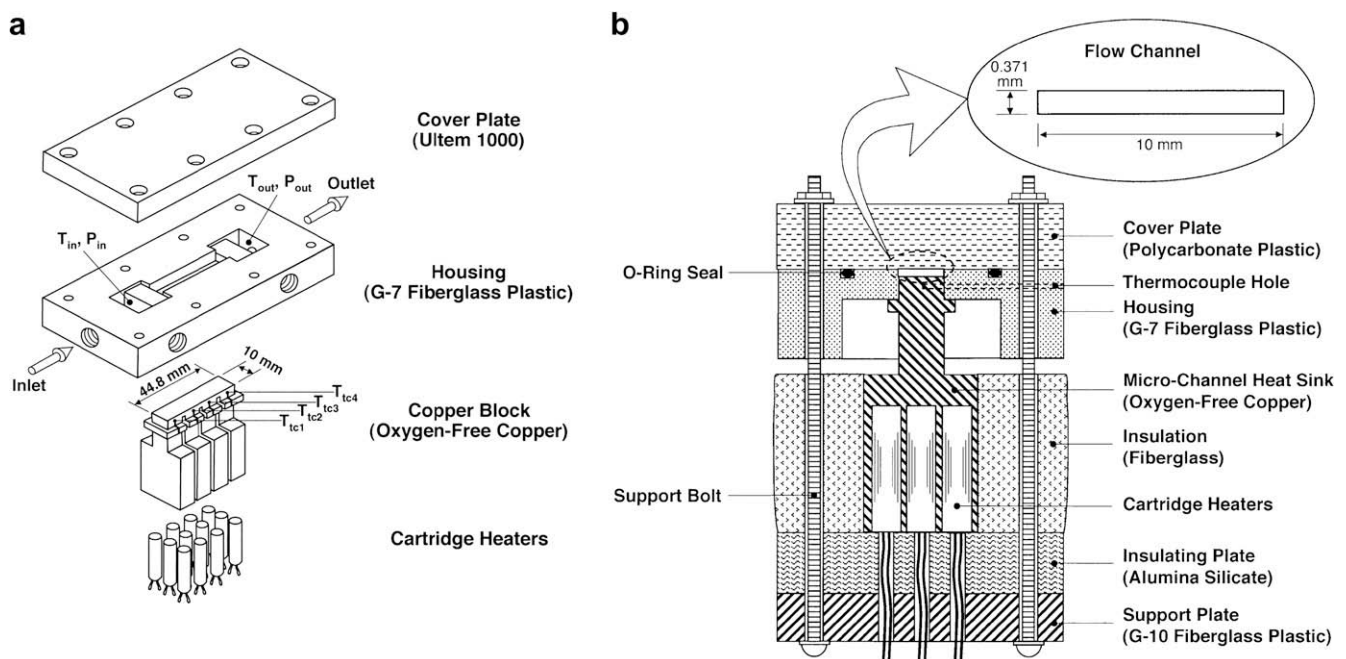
(a) Main components and (b) sectional assembly view of test module.
